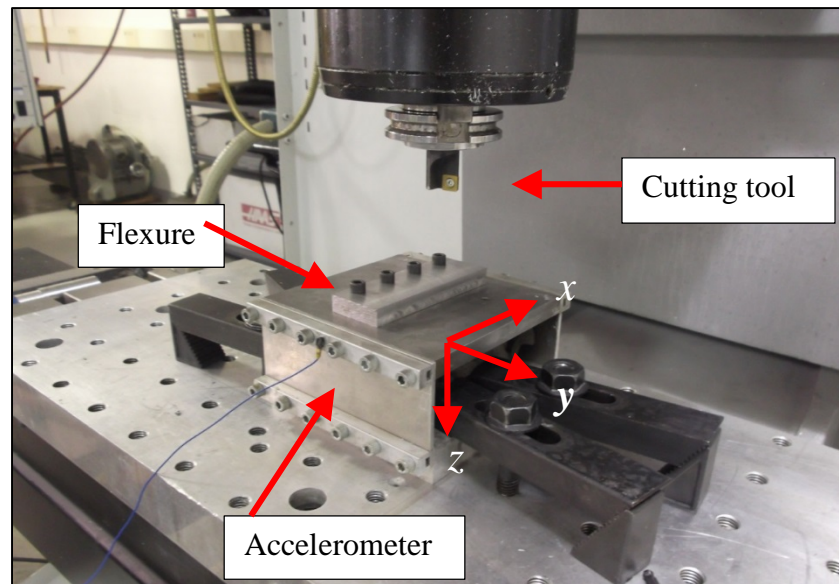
Photograph of milling setup. The test coupon was bolted to the flexure. An accelerometer was used to measure the vibration during  $x$ -direction cutting and identify stable and unstable conditions.
